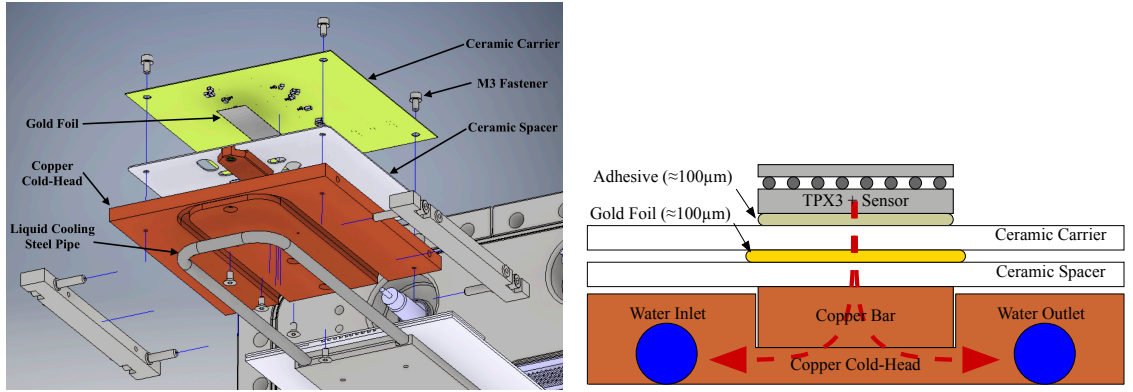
The cooling stack thermally connect the HPDs to the chilled liquid. Left: Exploded view (Ceramic carrier in false colours). Right: Schematic view.
